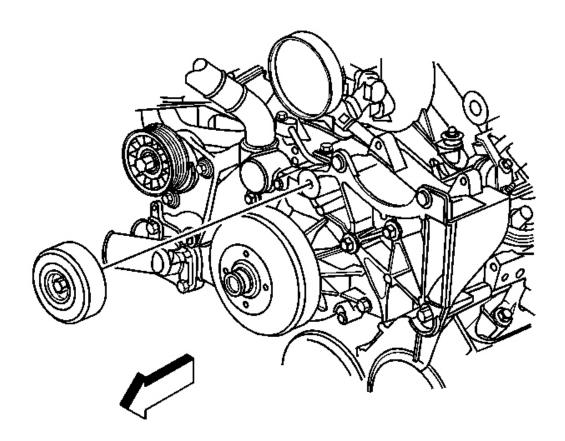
View Of Accessory Drive Belt Idler Pulley Courtesy of GENERAL MOTORS CORP.
